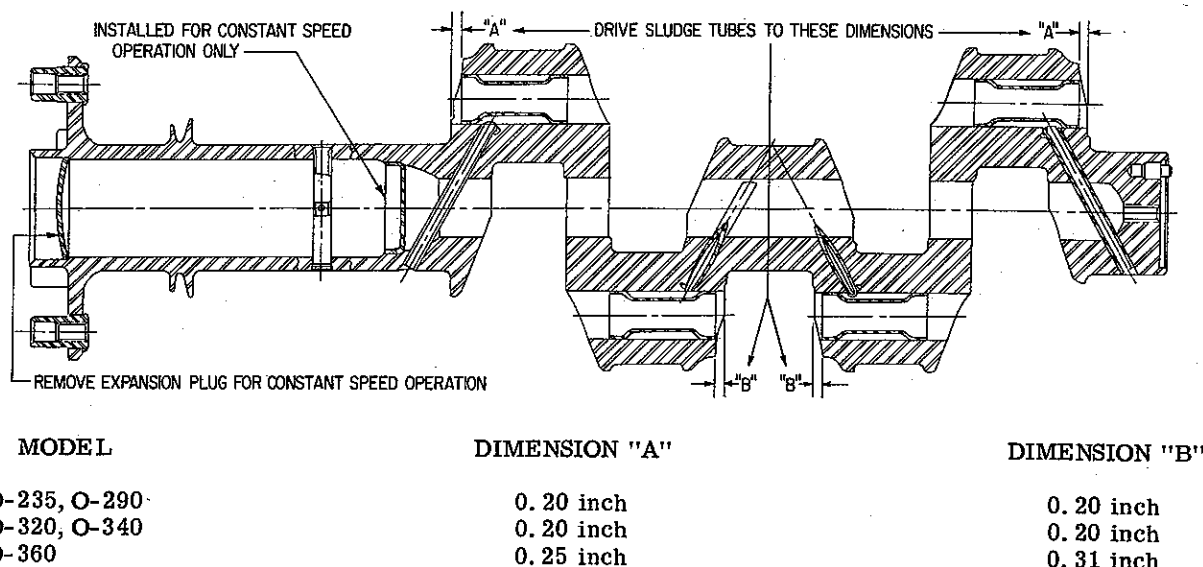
Dimensions to Drive Sludge Tubes (Four Cylinder Engines)
